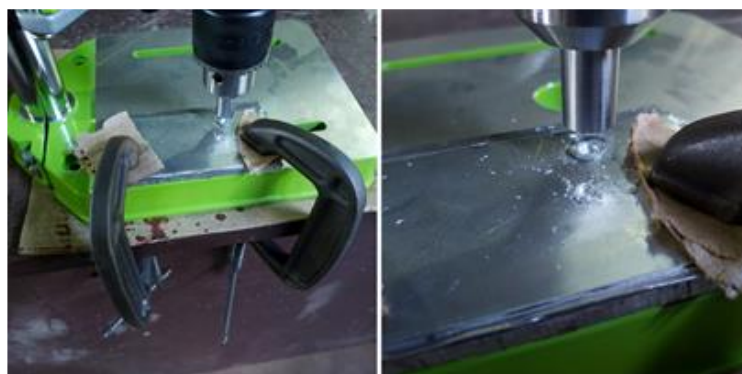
3-inch C-type clamping arrangement used for μ -FSW.
